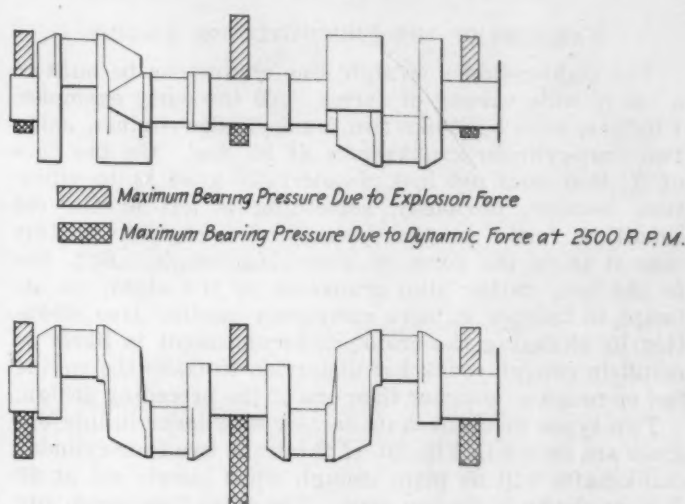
CRANKSHAFTS FOR EIGHT-CYLINDER ENGINES
